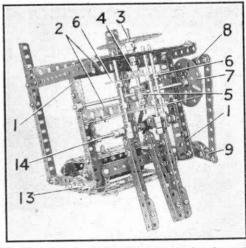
A plan view of the auto-change gear-box shown at the top of this page.
